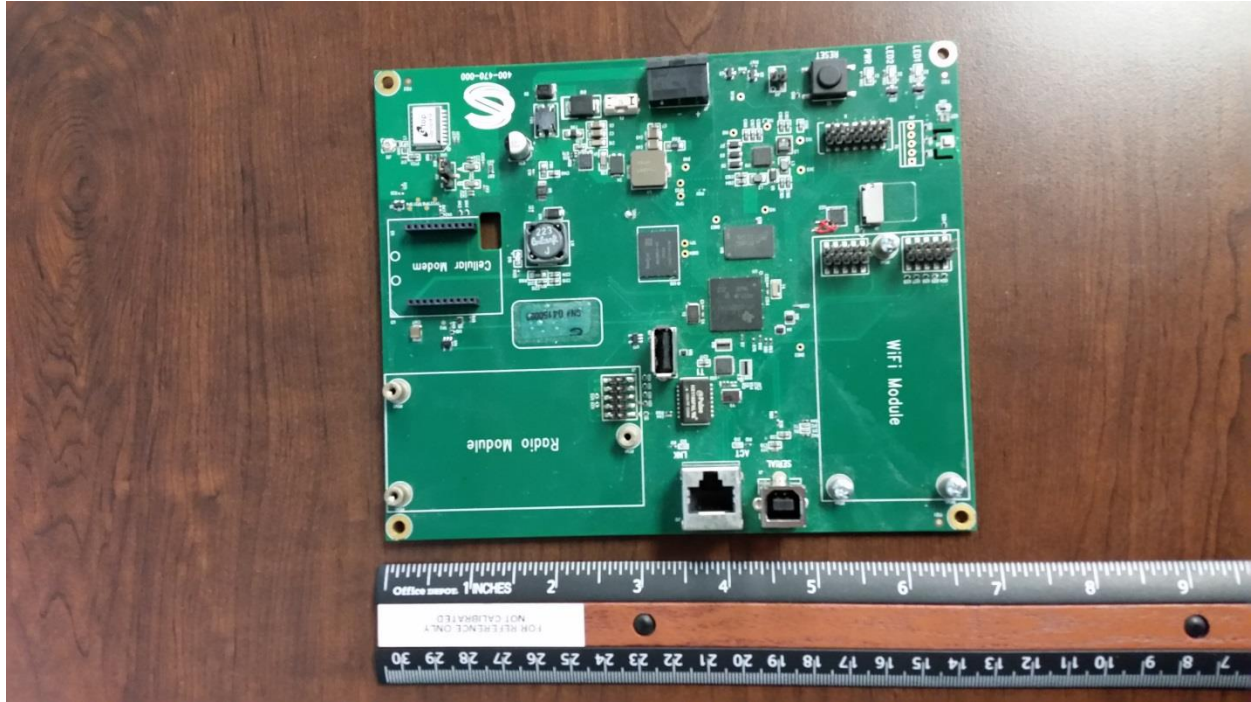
Internal Photos, Main PCB with Radio PCB Removed
